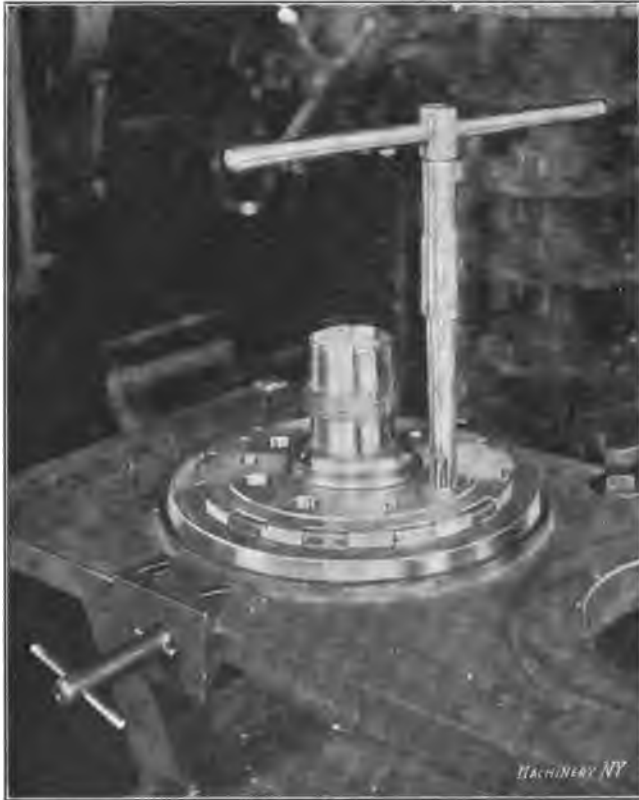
Line-reaming the Pivot Holes in the Assembled Gear Cases and Covers
